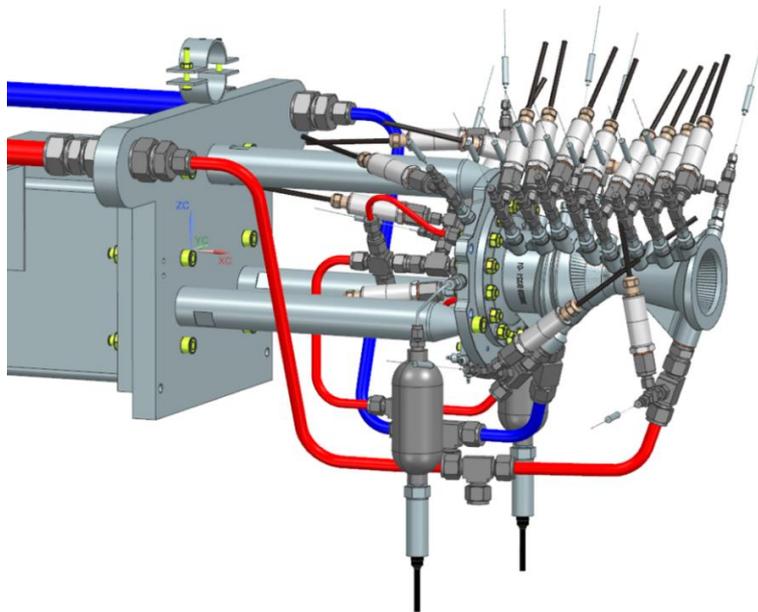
View of the Breadboard Engine CAD Model attached to the Test Stand [9]
